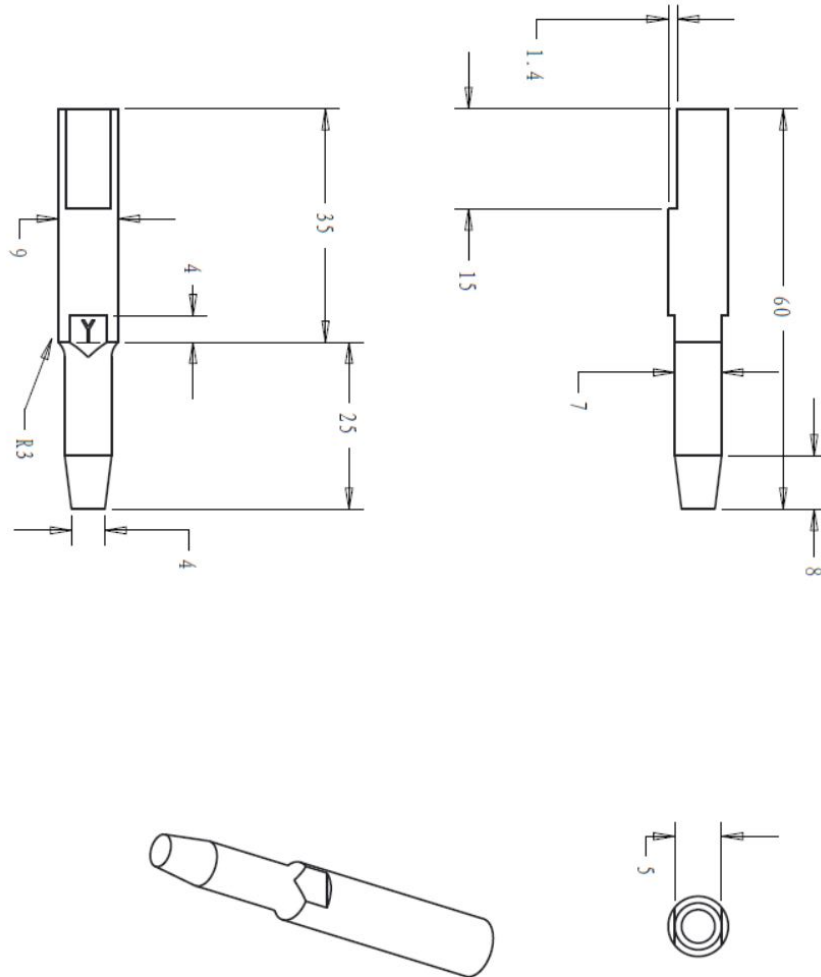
The engineering drawing of FSW tool's probe. All dimensions are in mm.
